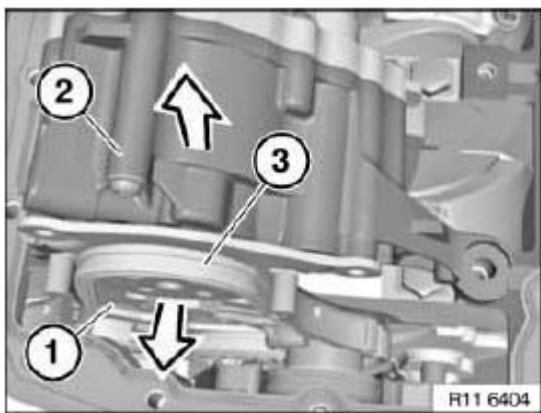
Identifying Oil Pump, Timing Chain And Sprocket Wheel
